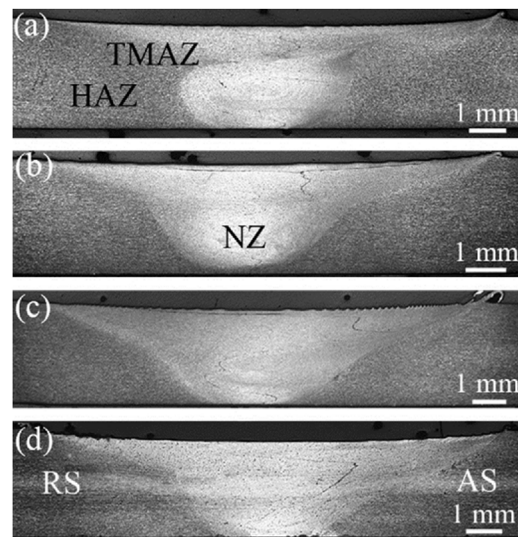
Cross-sectional macrostructures of various FSW joints: (a) A-800, (b) A-200, (c) W-800, and (d) W-200 samples.
